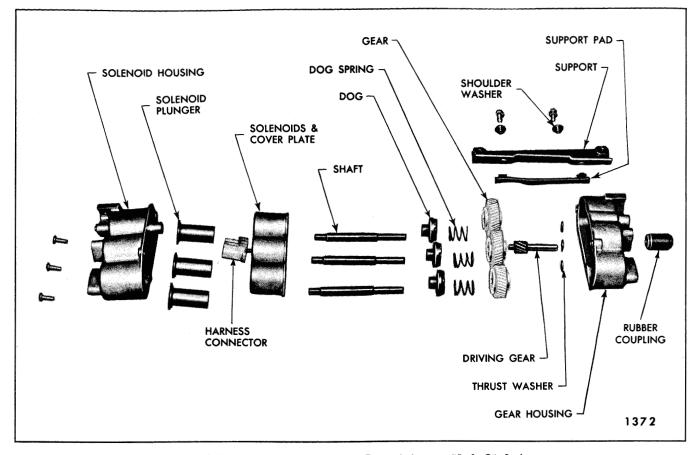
Six-Way Seat Adjuster Transmission - "B & C" Style
